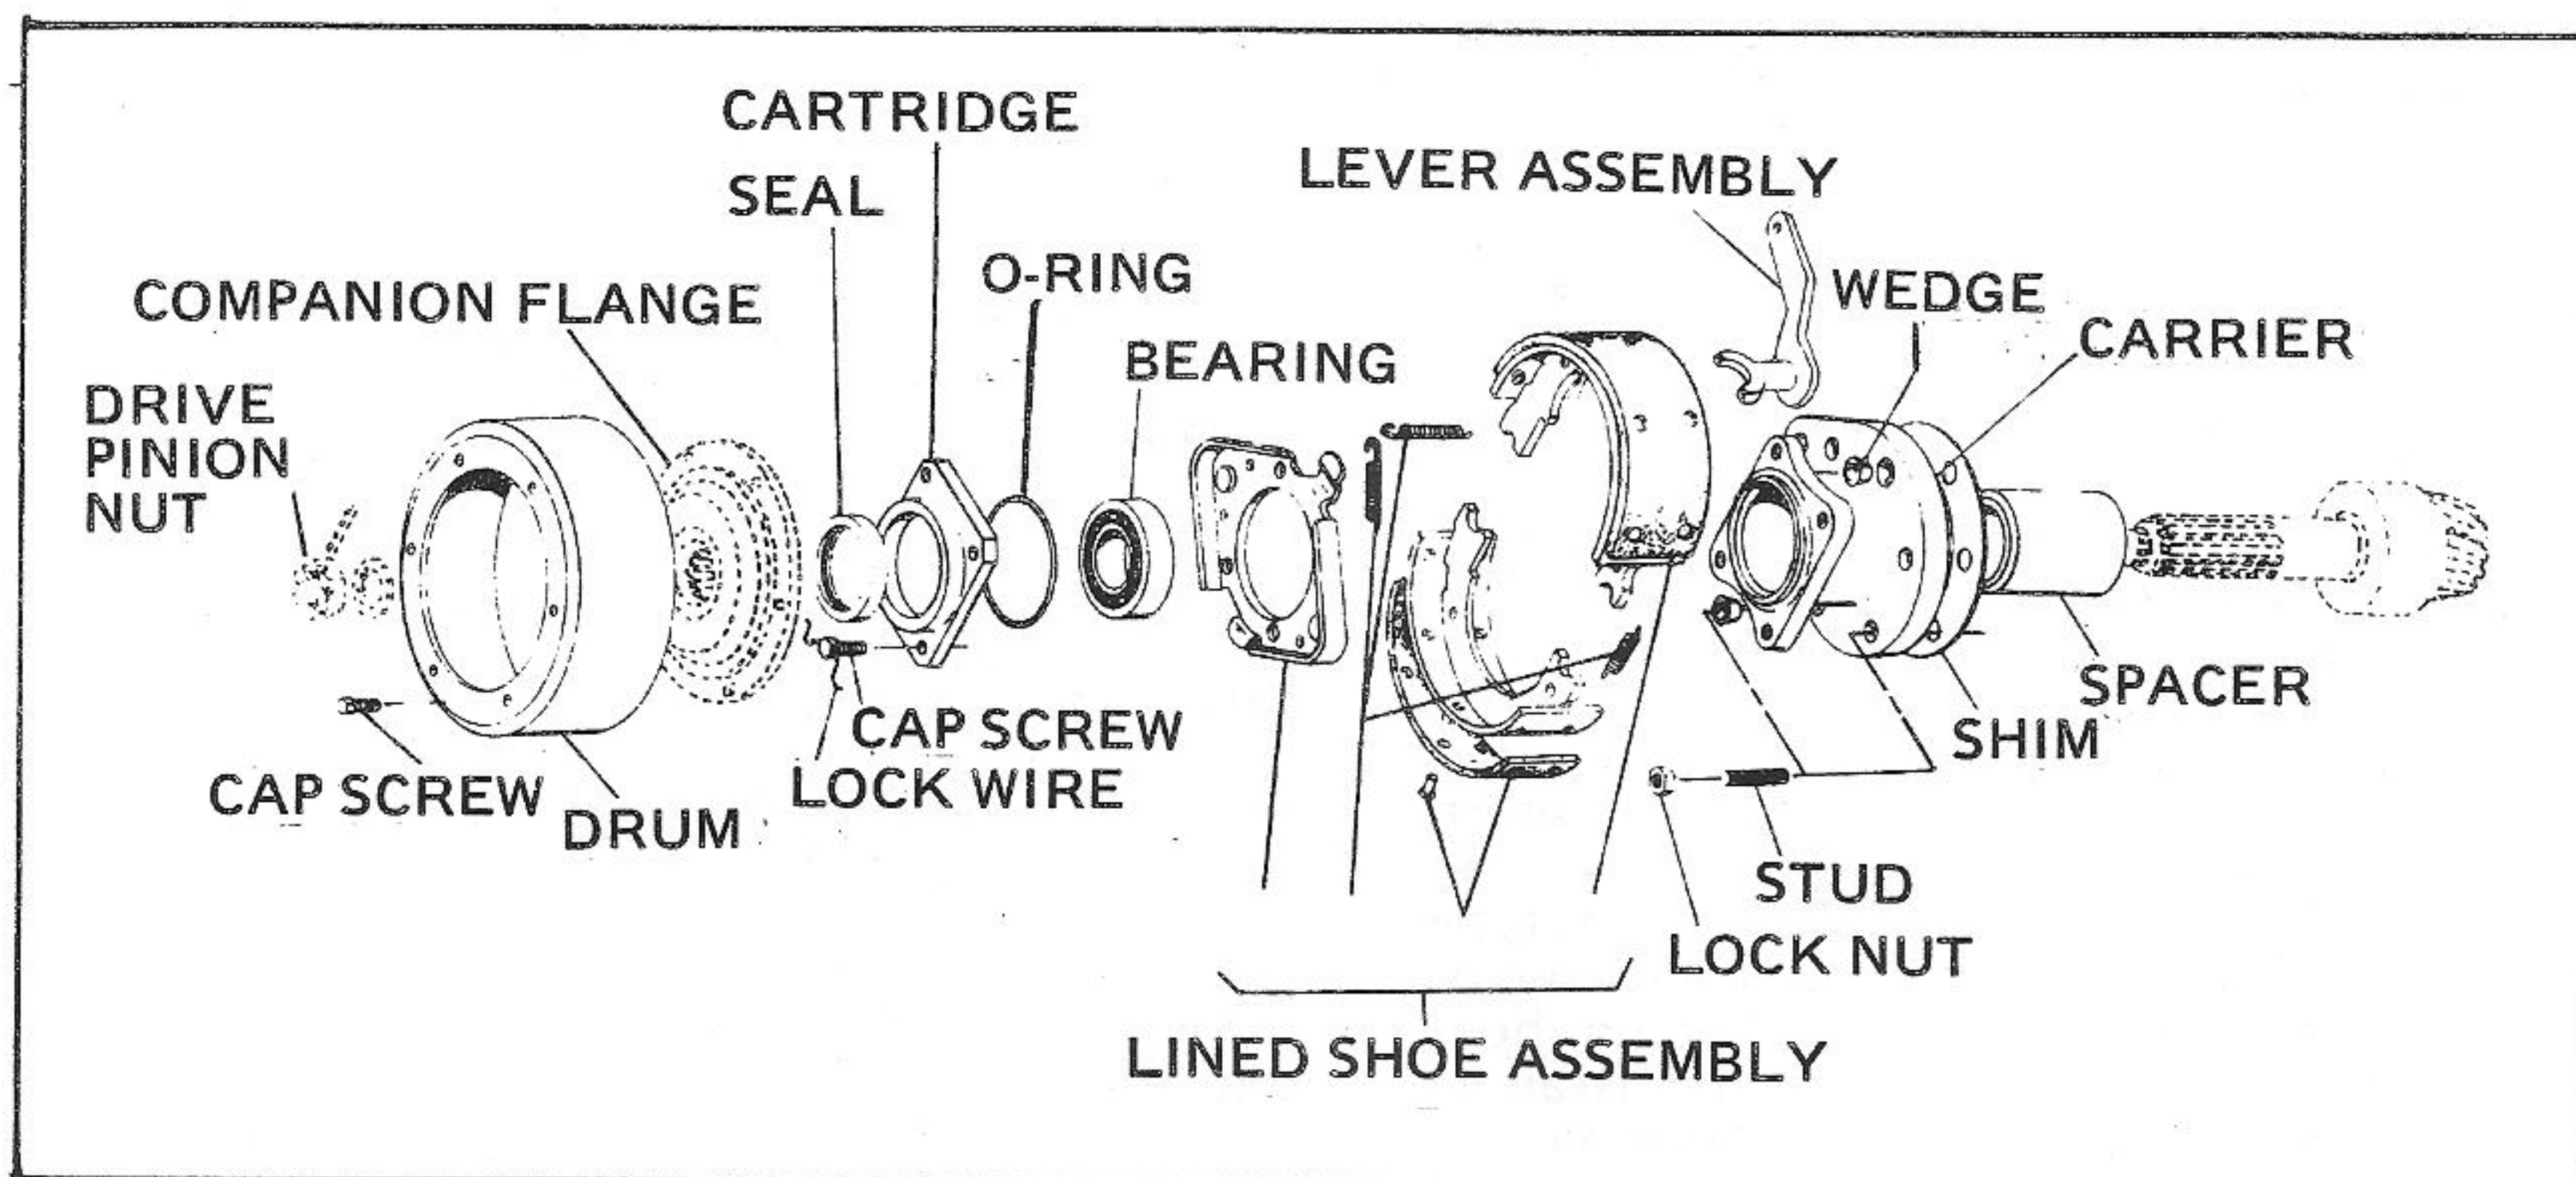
5. PARK BRAKE ASSEMBLY, EXPLODED VIEW
